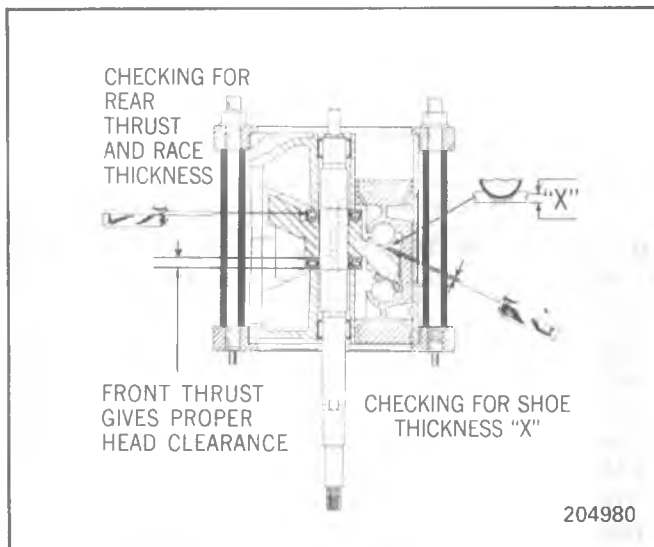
D-44 Checking A-6 Piston and Shaft End Play
